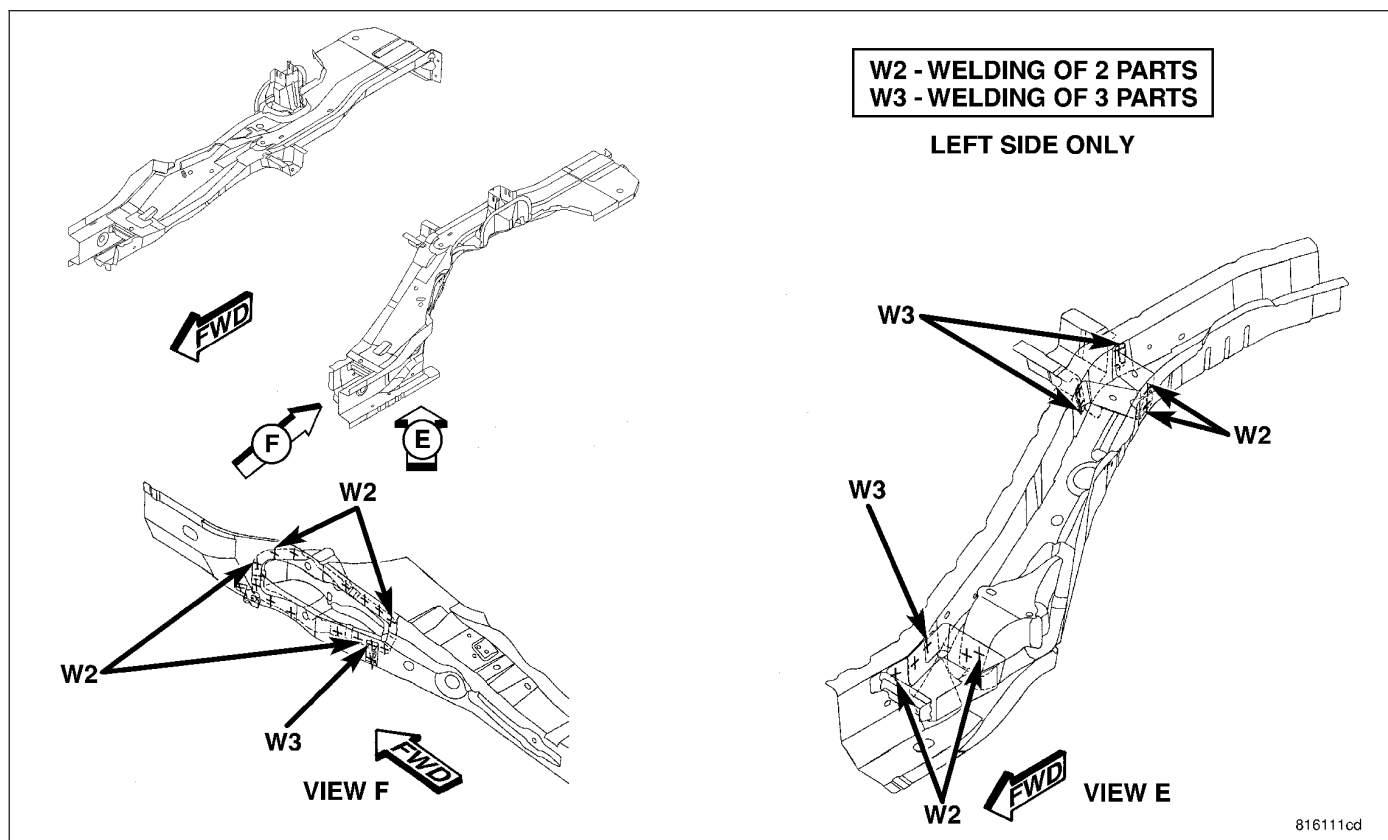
SIDEMEMBER ASSEMBLY (11 OF 17)
